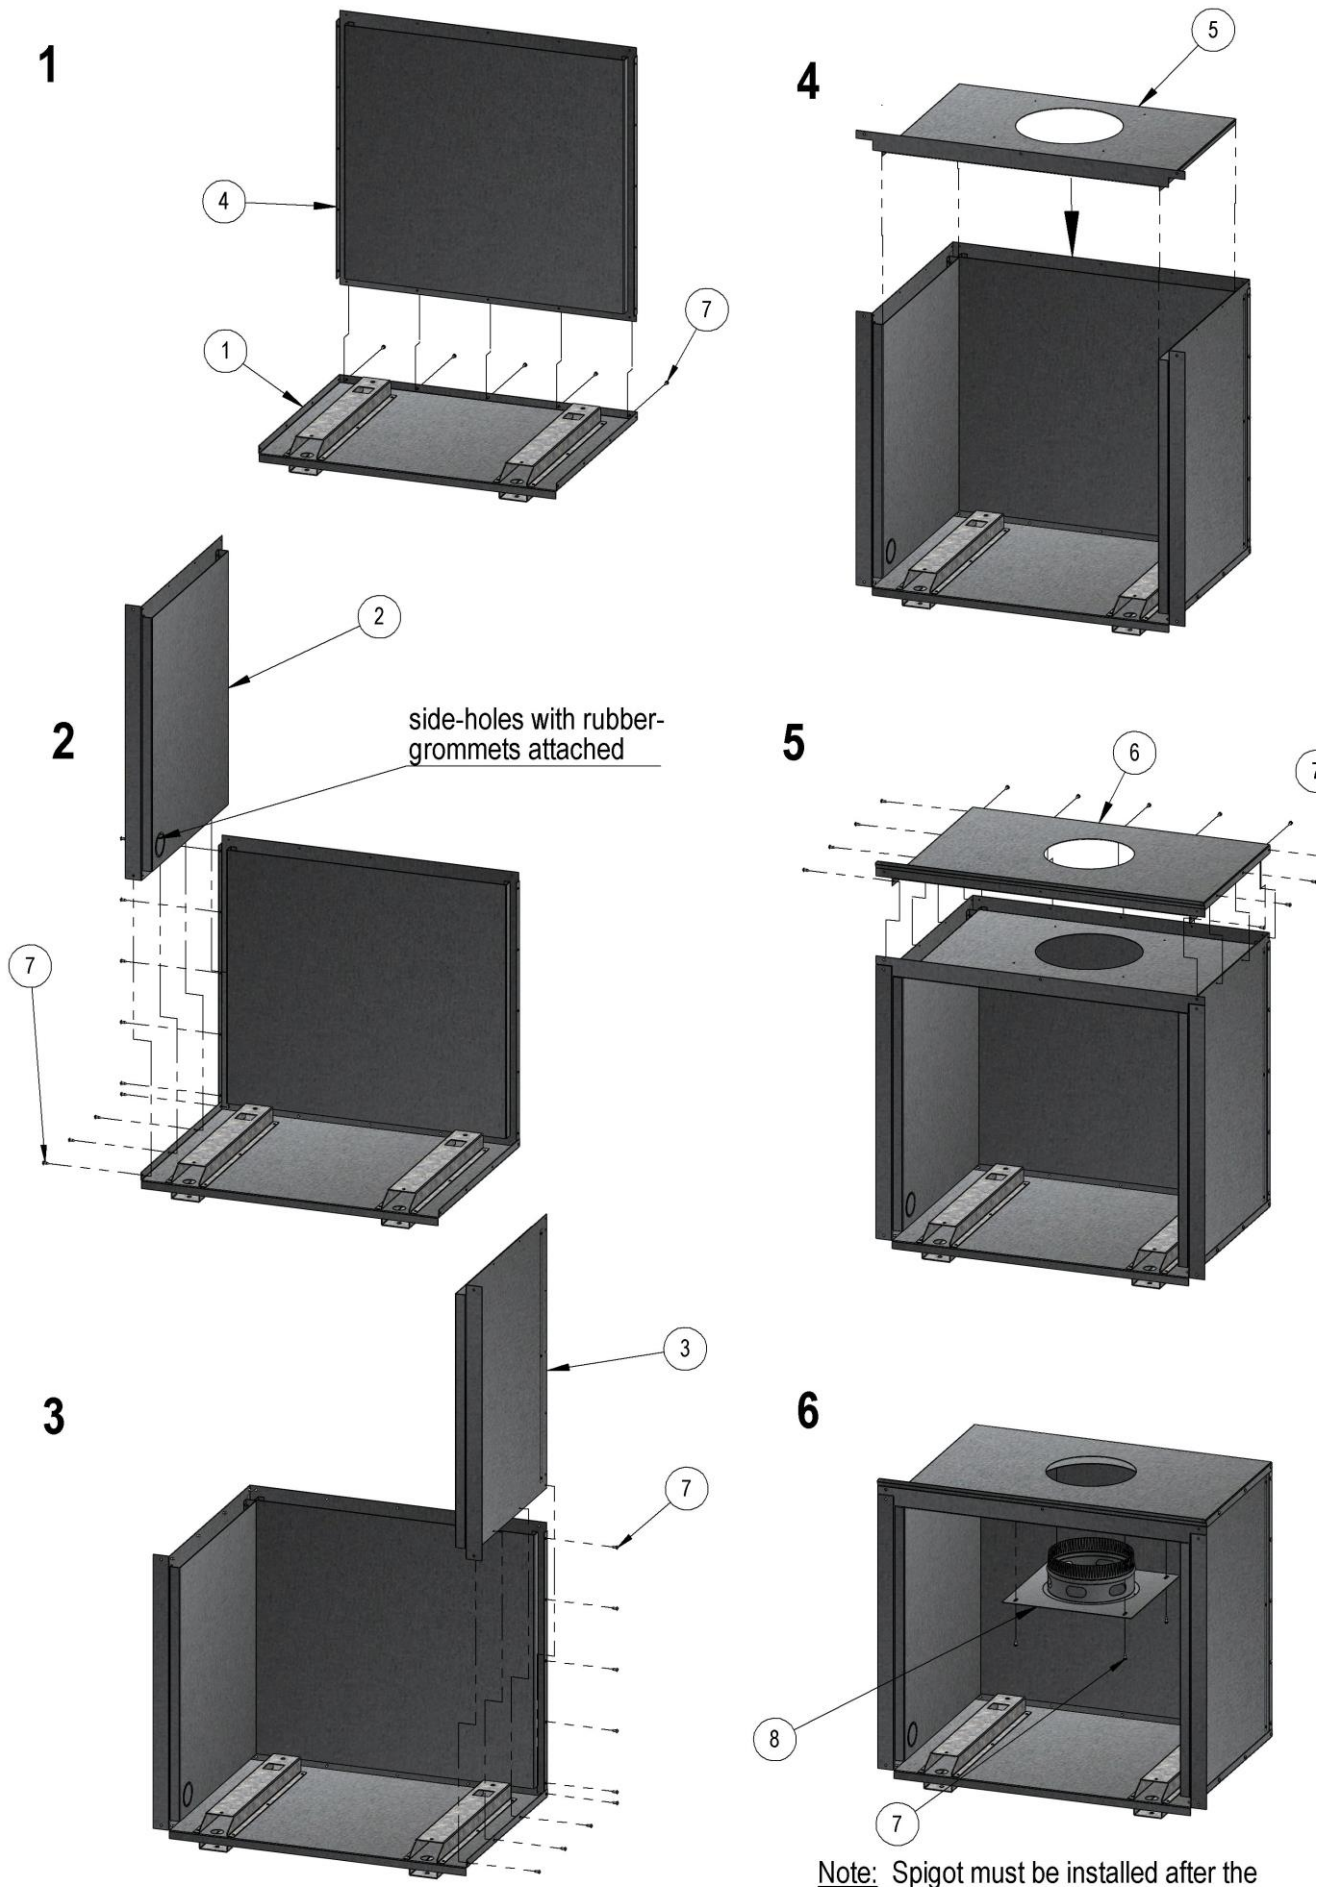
Zero Clearance Kit ASSEMBLY PROCEDURE
